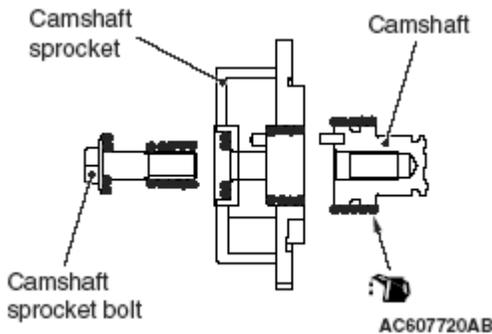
Identifying Camshaft Sprocket Bolt, Camshaft Sprocket And Camshaft
